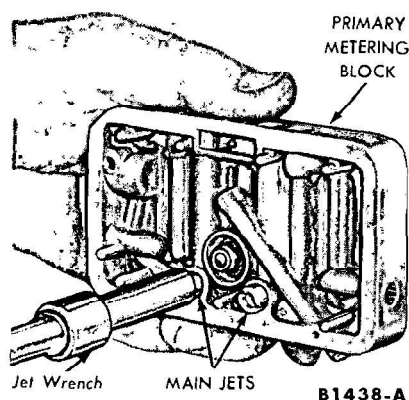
Main Jet Removal or Installation—Holley 4-V
